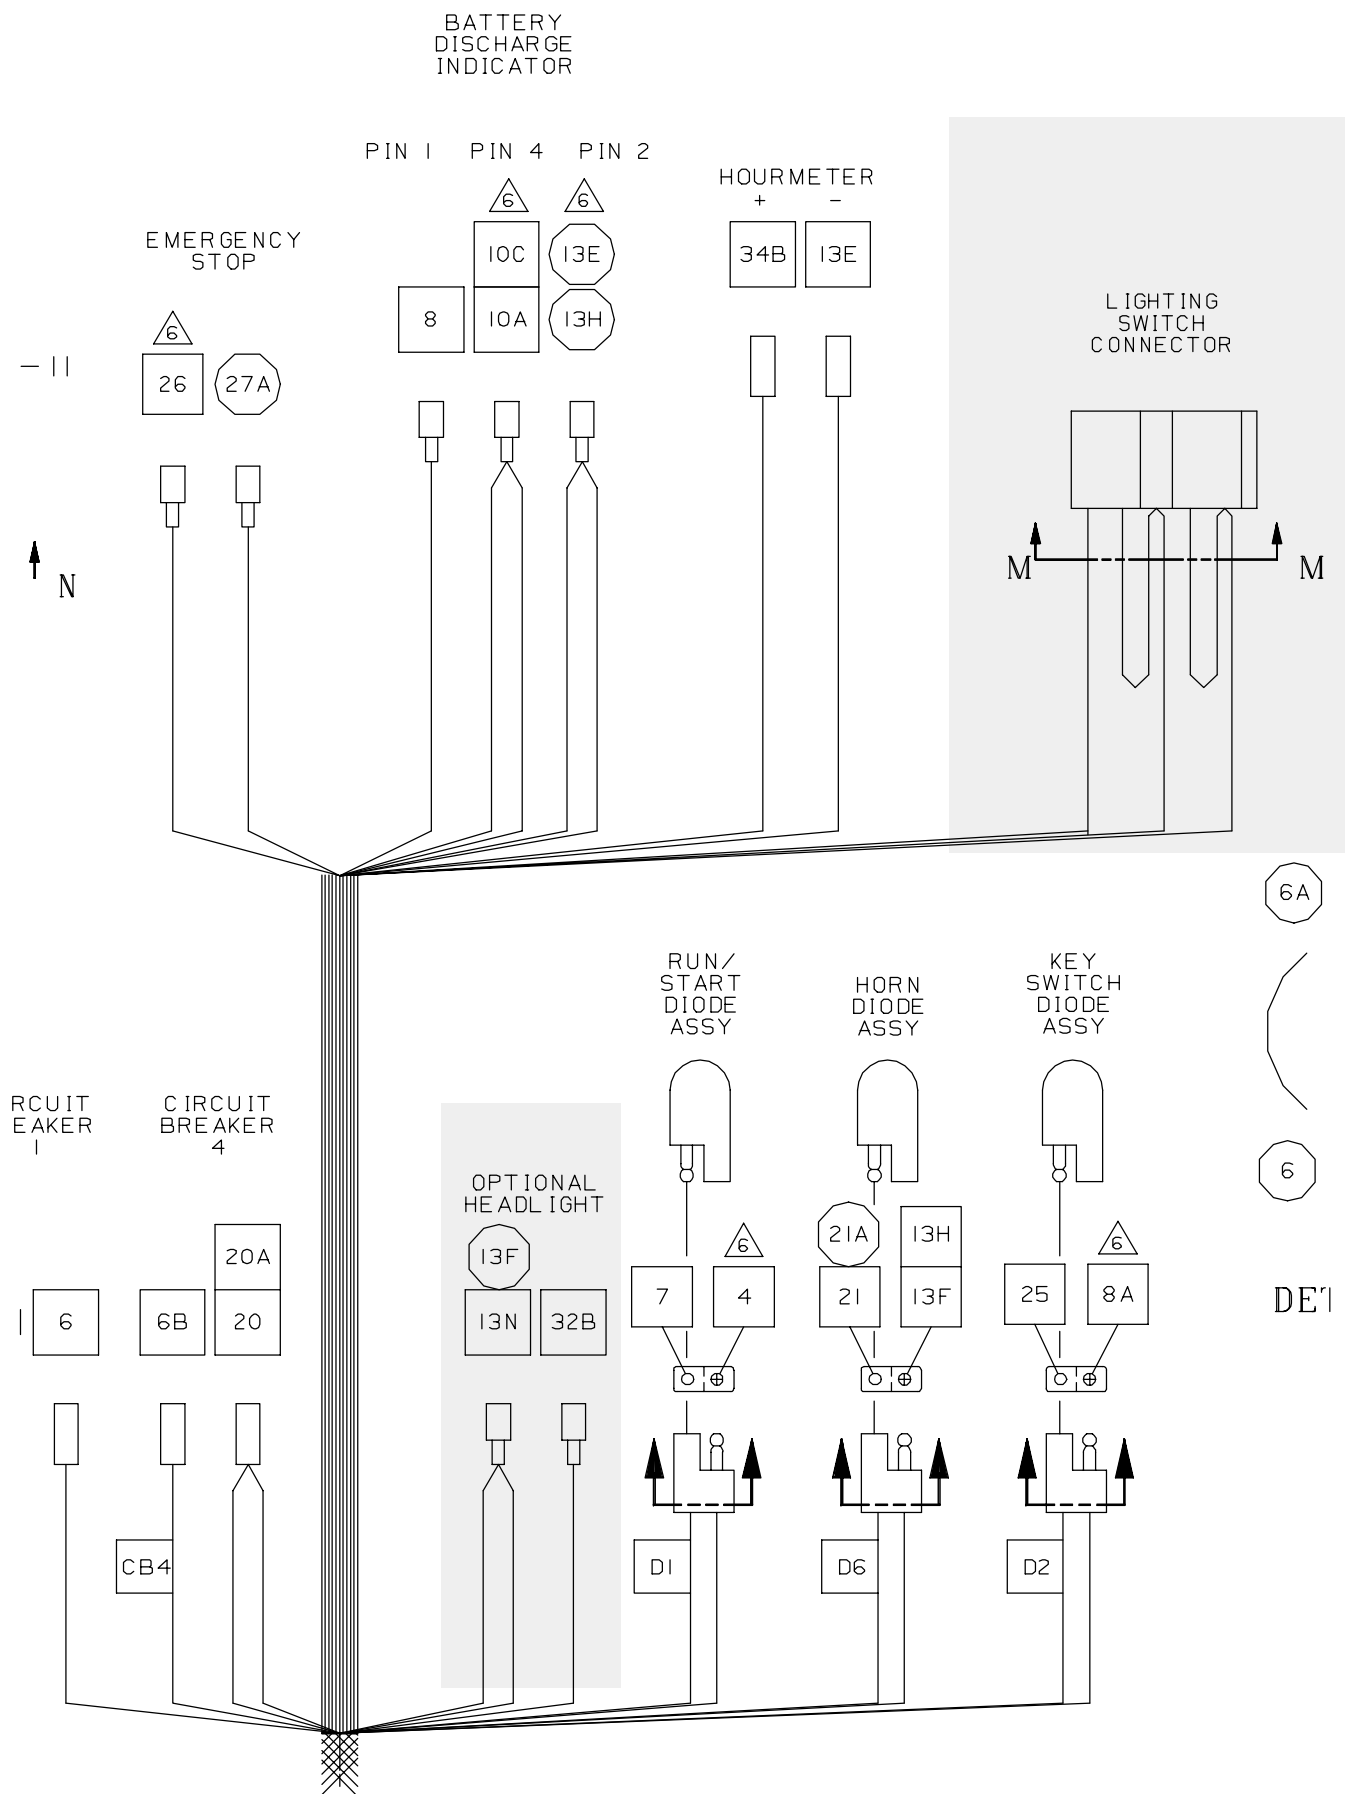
6100 WIRING HARNESS, WORK LIGHT INSTALLATION
